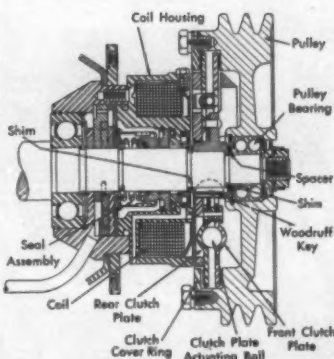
Cross-section drawing of magnetic clutch and compressor seal on 1957 Cadillac air conditioner.
